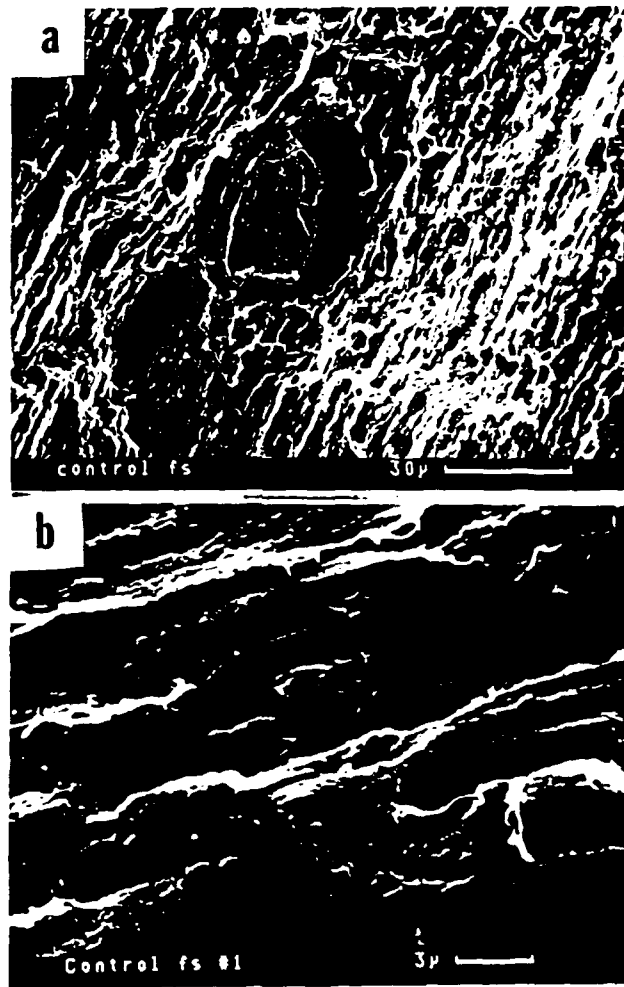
Fractographs of tensile specimens of the control material. The tensile axis of this specimen was normal to the extrusion direction. Note the striations on the fracture surface which run parallel to the extrusion direction.
